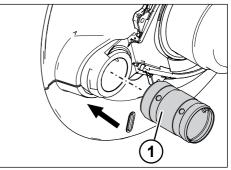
Inserting the brake carrier cam bearing bushing
